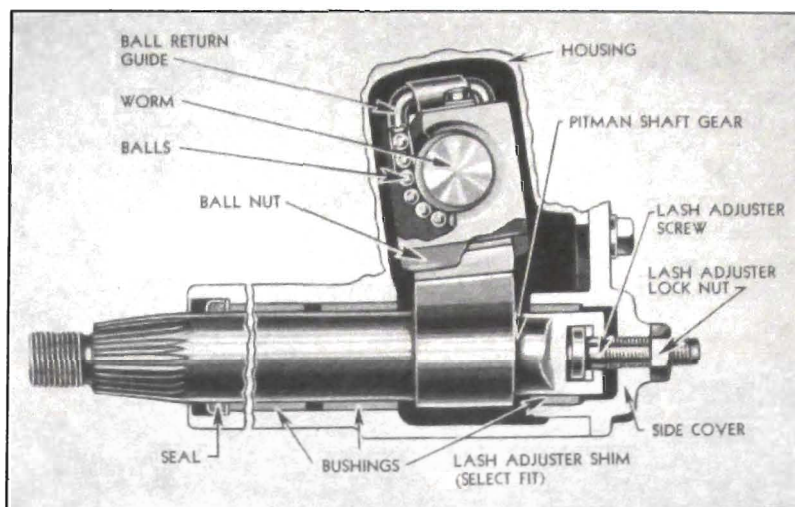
Cross Section of Ball Nut and Pitman Arm Shaft
